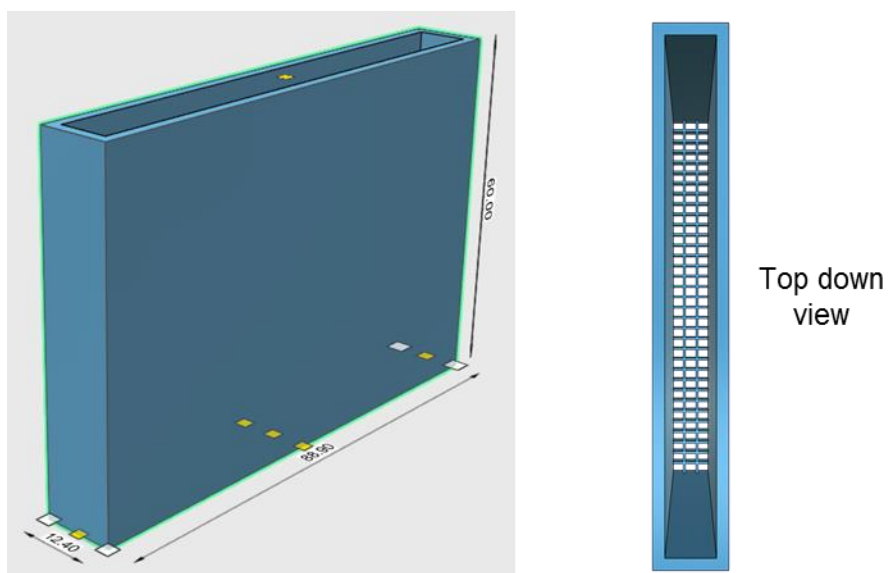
3D model used to print the graphite press used in larger scale reactor. Dimensions are in mm.
